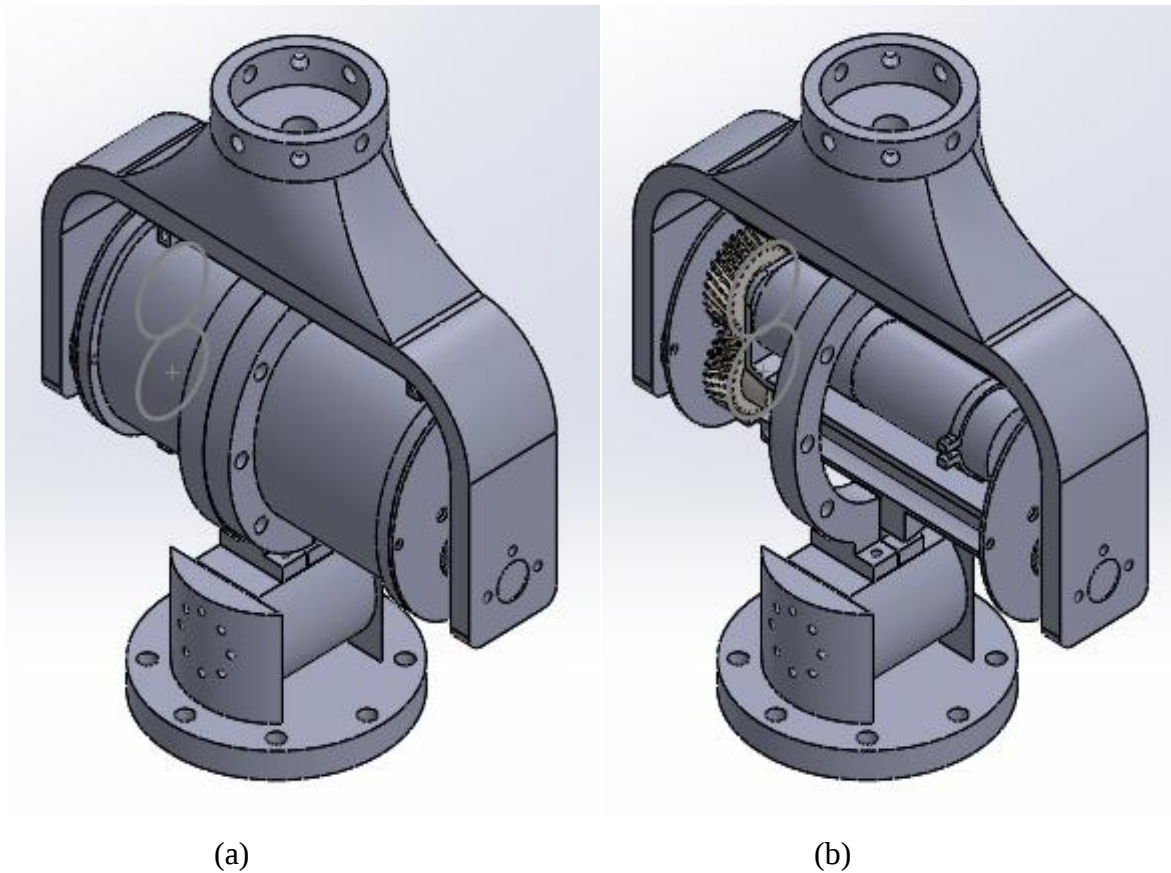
(a) Assembly of bevel gear approach (b) Assembly showing inner components
